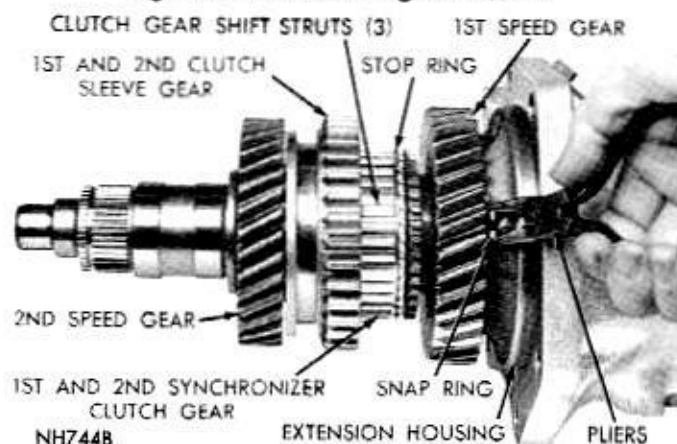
Removing or Installing Mainshaft Bearing Snap Ring—Front
